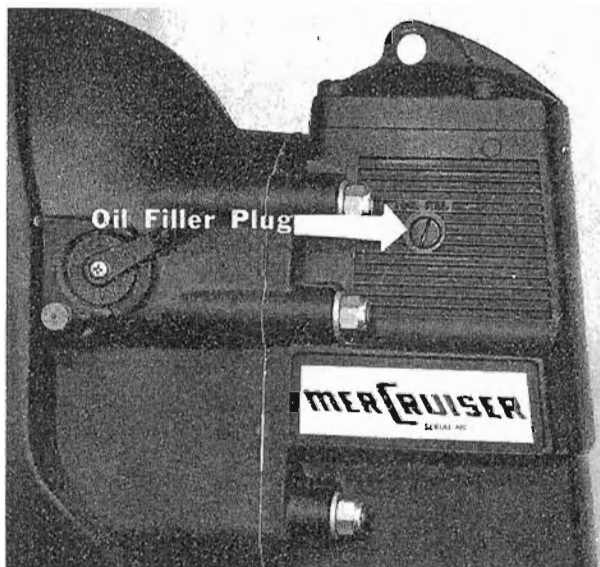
Oil Filler Plug in Upper Gear Chamber
